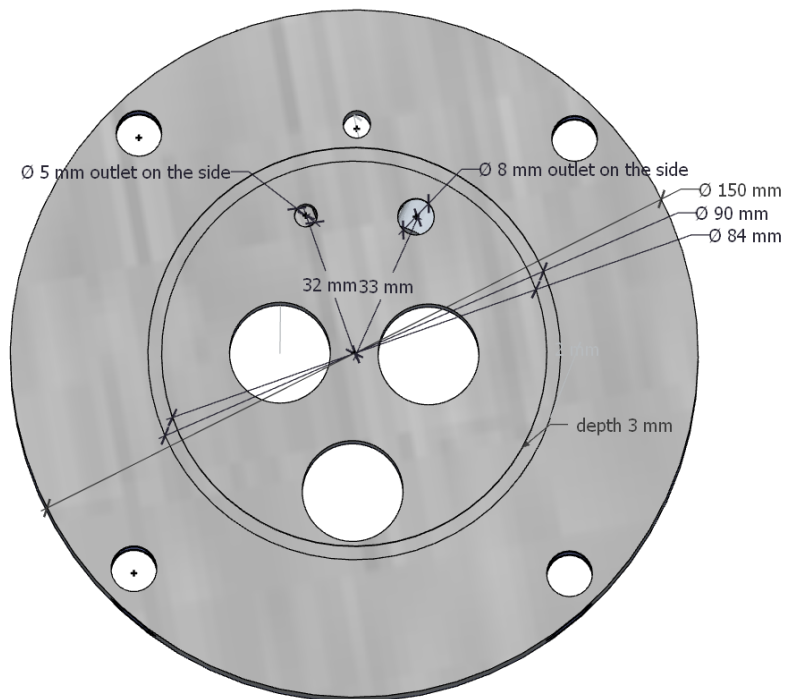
Bottom view of the stainless steel block placed over the glass tube
